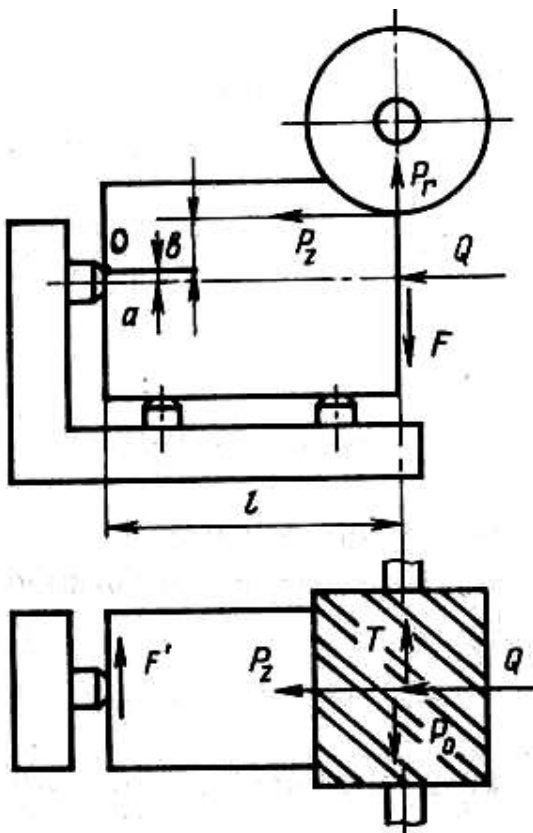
Diagram for calculation of clamping force value holding a workpiece at milling
